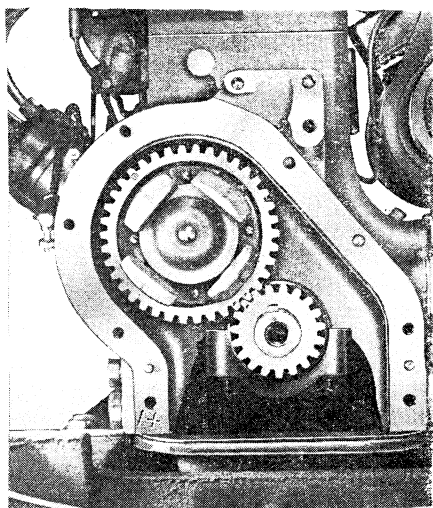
Continental N62 timing gears and valve timing marks. Oversize marking on cam gear corresponds with 1+ mark on gear case gasket surface.
